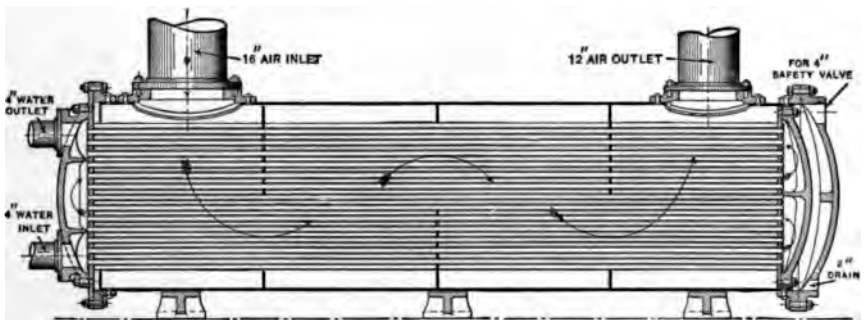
Horizontal Receiver-Aftercooler (Ingersoll-Rand Co.).
